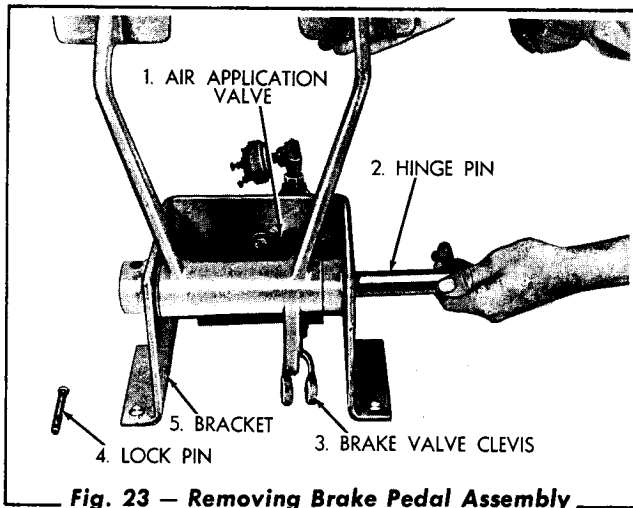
Removing Brake Pedal Assembly Hinge Pin
